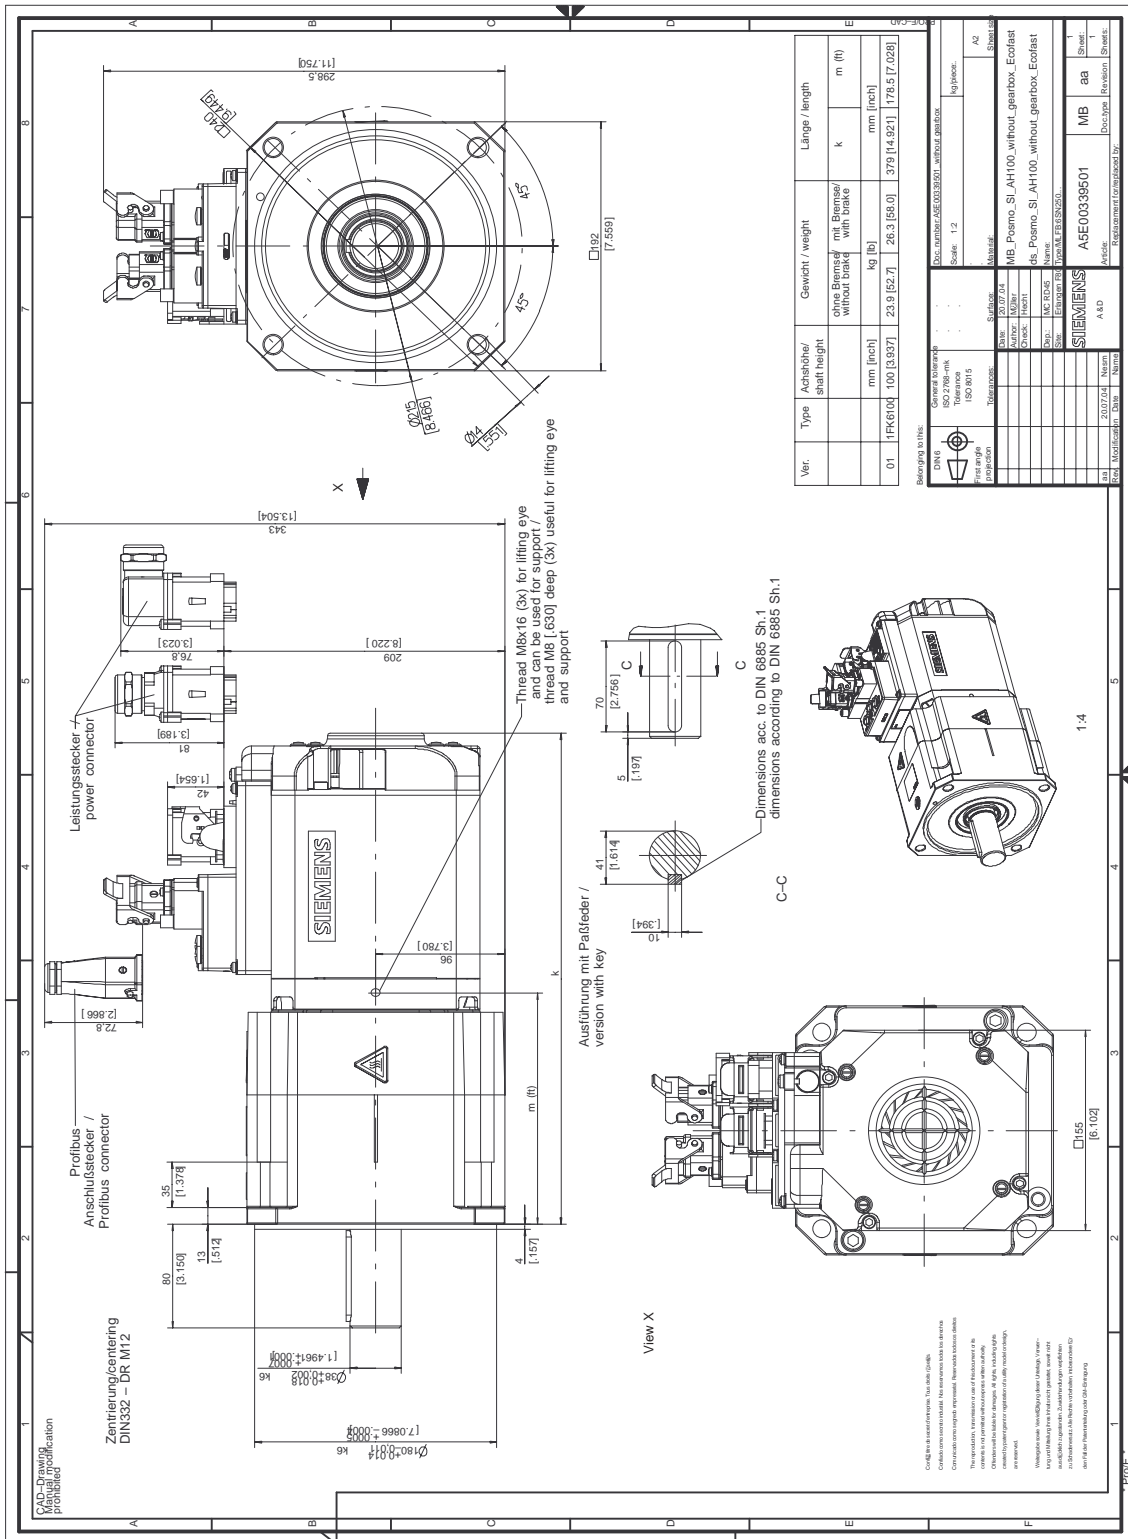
Dimension drawing POSMO SI 6SN2500-2CF□□-1G□□
